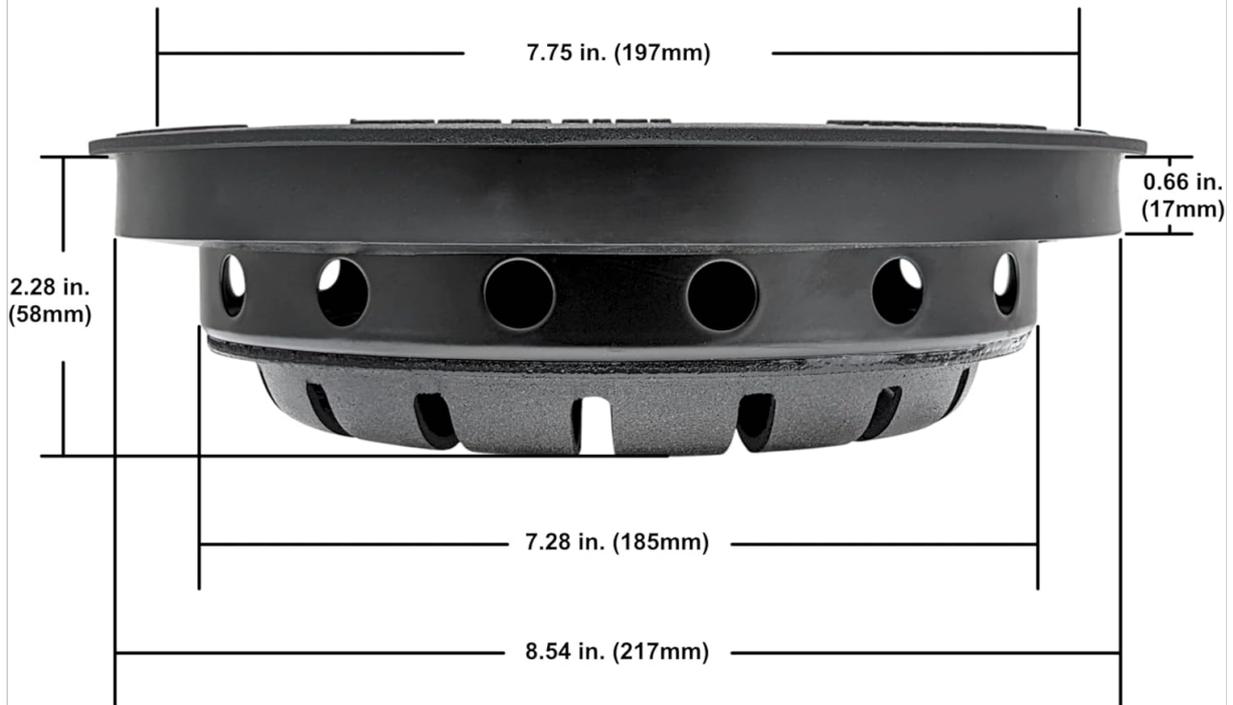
Mounting dimensions of the SLAPS-M8v2 with gasket (7.75 in. / 197mm outer diameter, 2.28 in. / 58mm depth).
